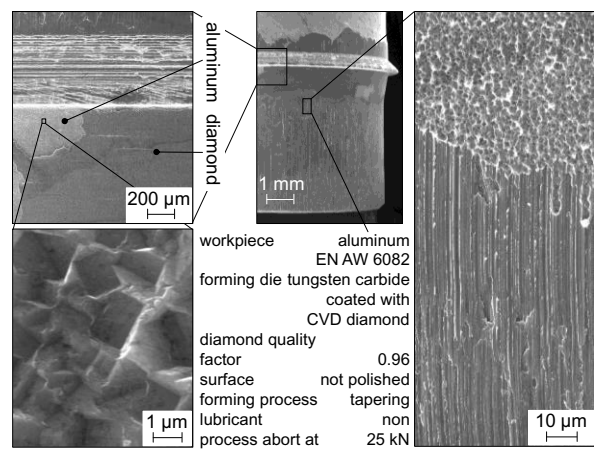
Secondary electron images of the workpiece after the aborted tapering processes with a CVD diamond coated forming die.
